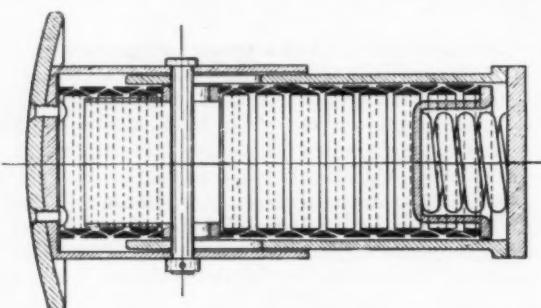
RAILROAD BUFFER INCORPORATING THE RING SPRING SHOWN IN FIG. 7
